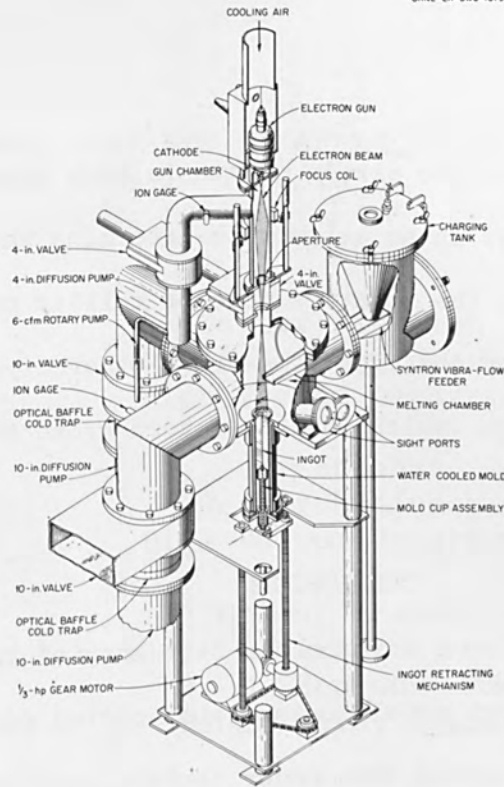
Schematic Cutaway Drawing of Electron-Bombardment Furnace.
